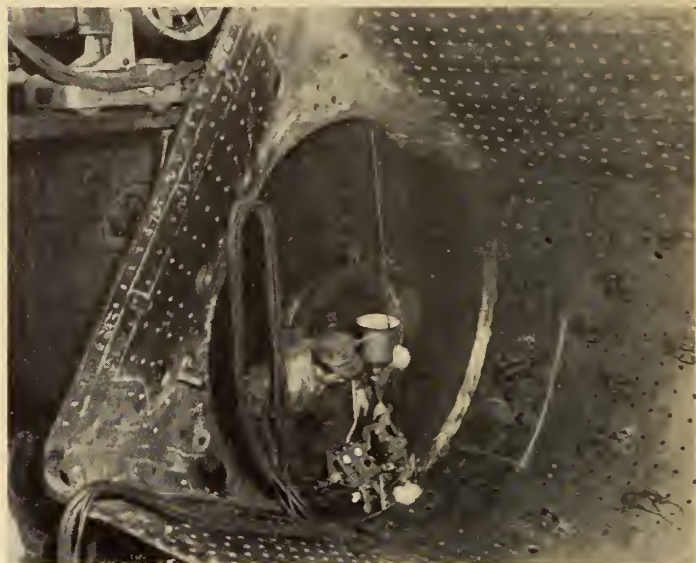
Welding third course to wrapper sheet and throat sheet.
